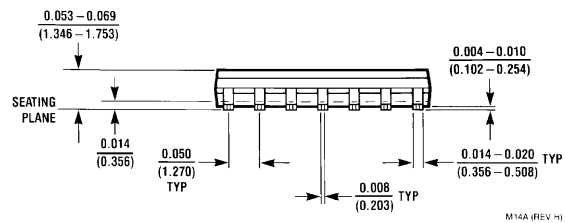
illustrates the dimensioning of a mechanical part. The drawing shows a cross-section of a component with various dimensions and tolerances. Key dimensions include:
